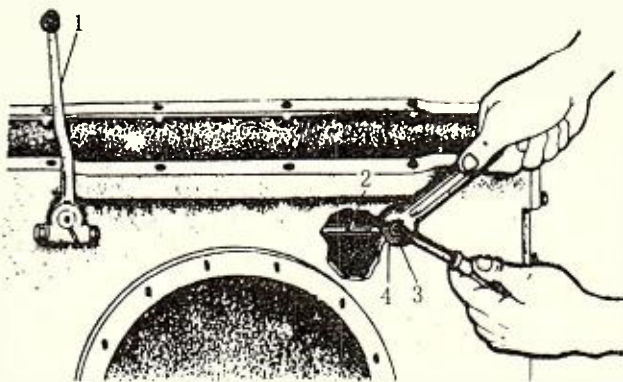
3 Adjusting the limiting screw of PTO shift fork shaft
